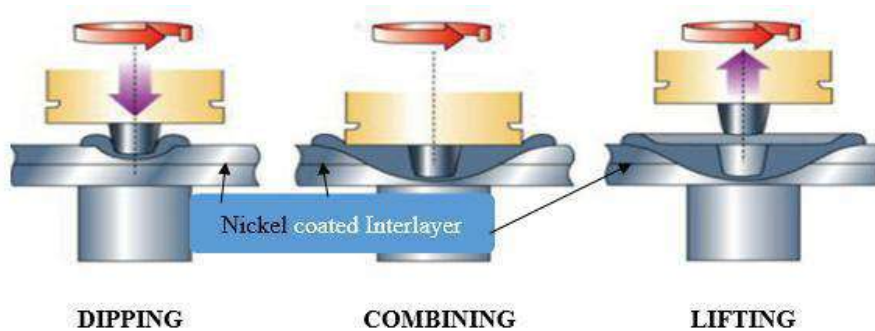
A schematic illustration of the friction stir spot welding FSSW process steps for joining AA5754/Ni/AA1050 Aluminum alloys [6]
